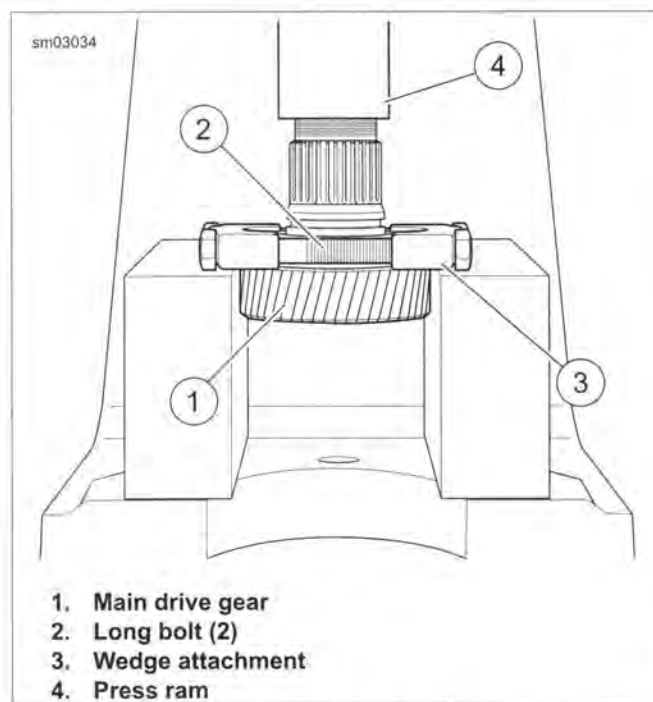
Removing Inner Bearing Race From Main Drive Gear
